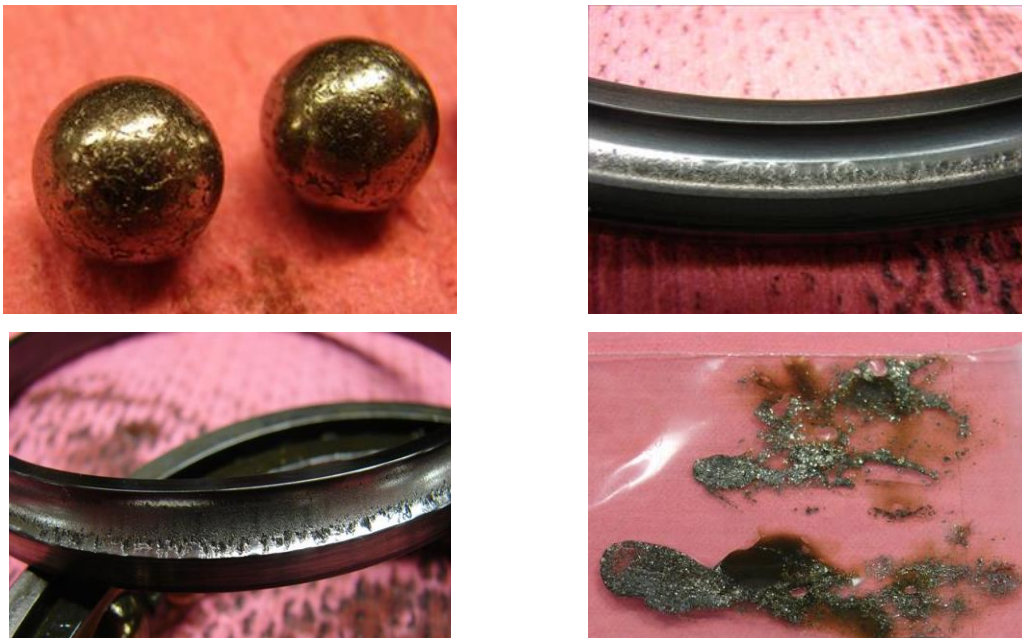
(Top left) Pitting on ball bearing elements, (Bottom left) Spalling on Inner race, (Top right) Spalling on Outer race, (Bottom right) Wear debris from removed grease sample
